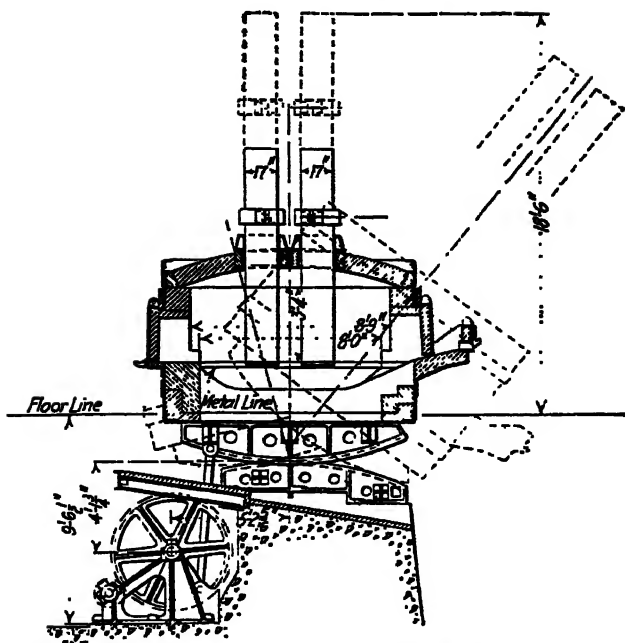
Section through a 7-ton Heroult furnace showing tilting mechanism Latest model.
